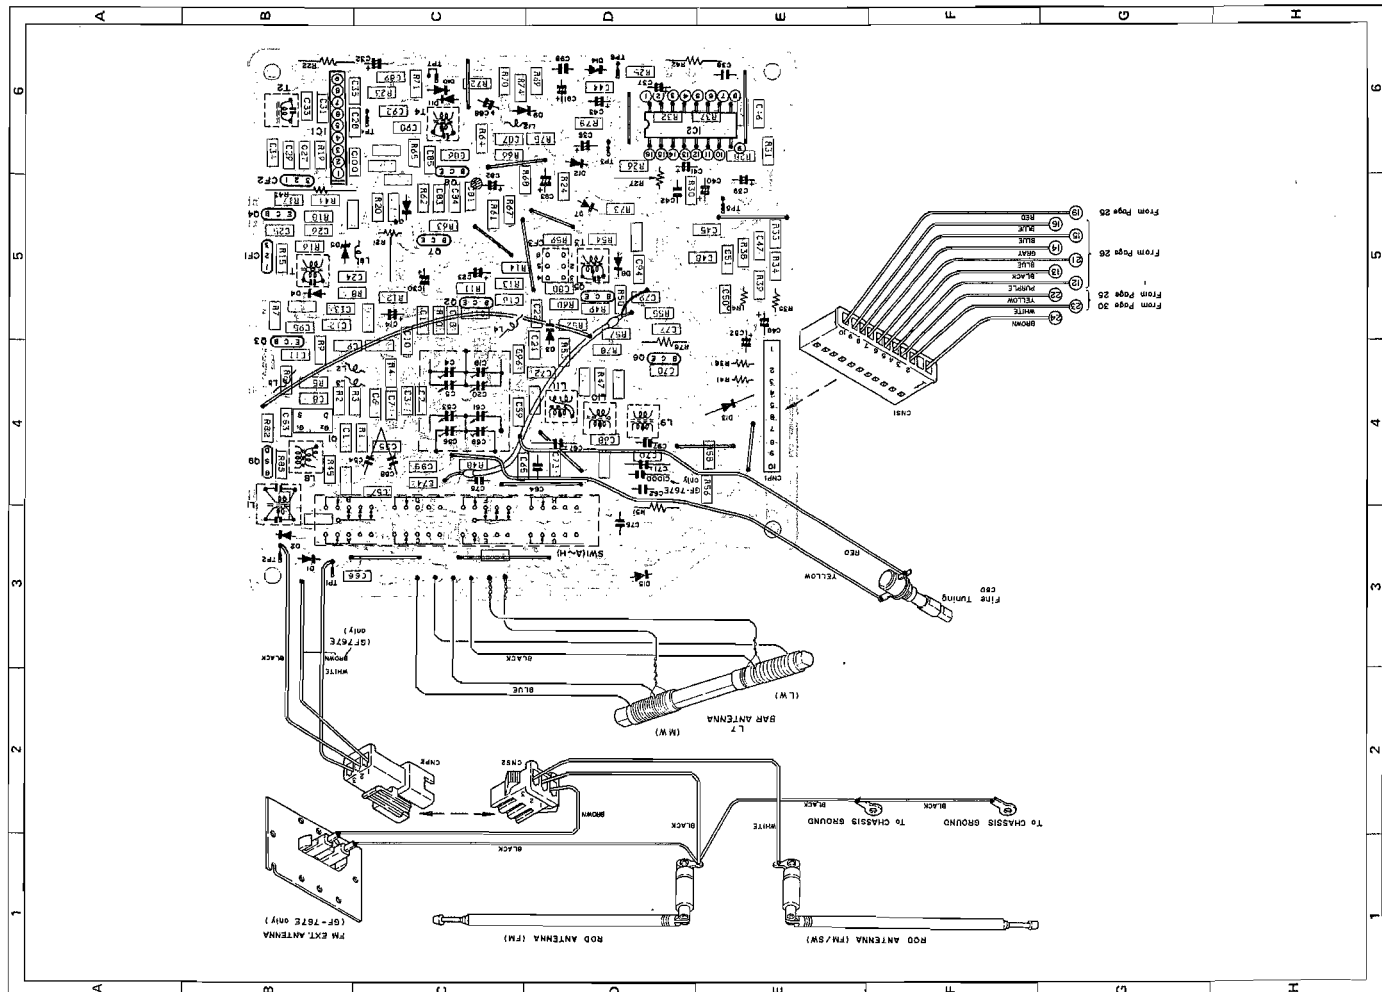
WIRING SIDE OF P.W. BOARD (1/6)
